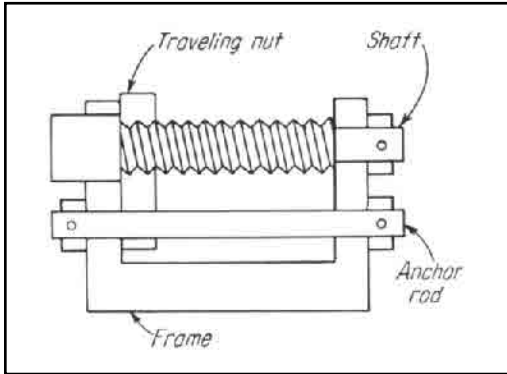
A traveling nut moves along the threaded shaft until the frame prevents further rotation. This is a simple device, but the traveling nut can jam so tightly that a large torque is required to move the shaft from its stopped position. This fault is overcome at the expense of increased device length by providing a stop pin in the traveling nut.
